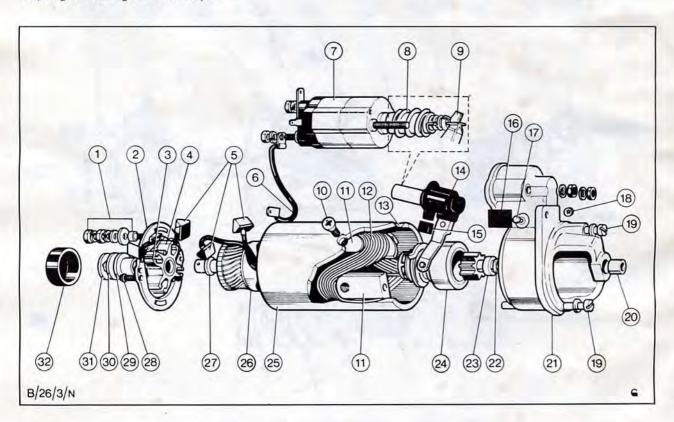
Lucas 5M90 (Pre-Engaged) Starter motor
